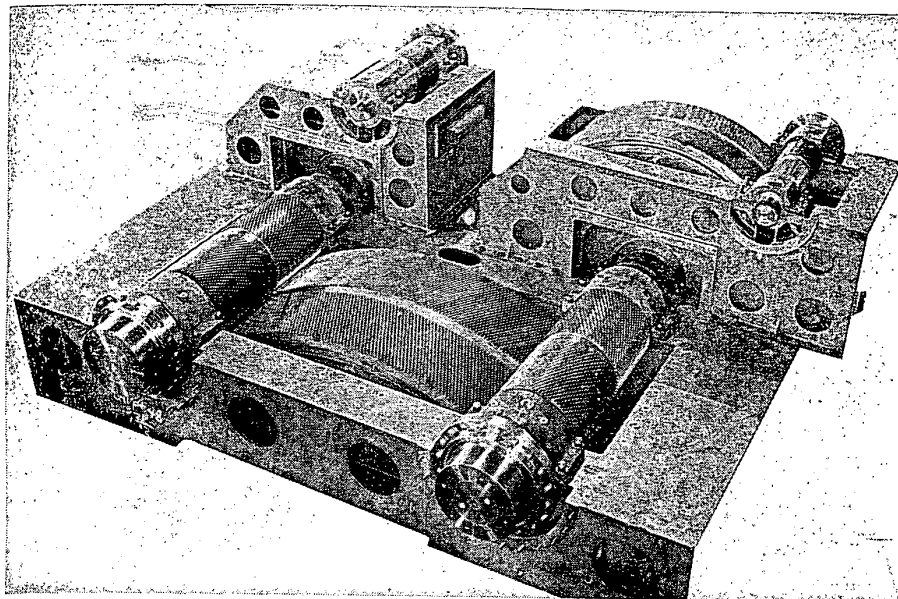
Marine MD-type gear unit with covers off. Rating 17,500 hp. (Courtesy of General Electric Co.)
